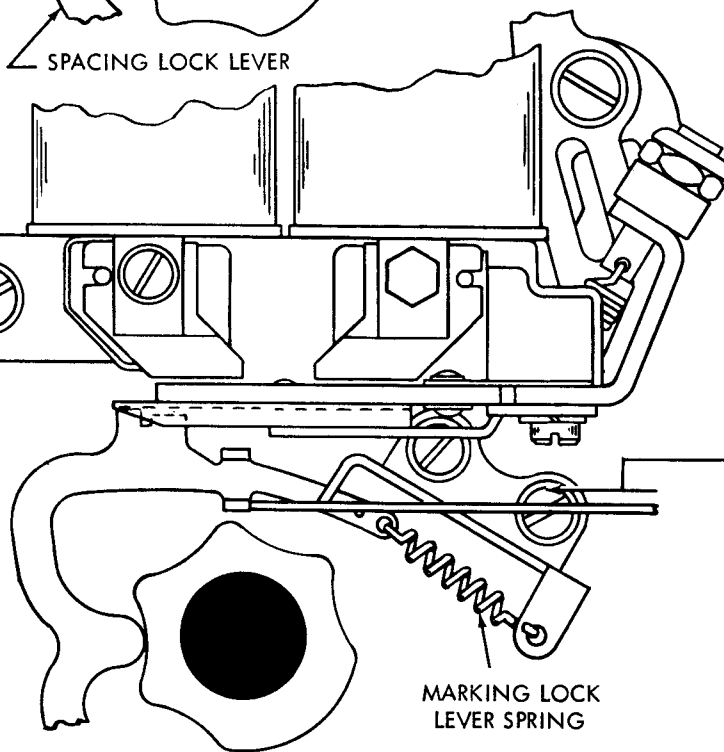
Automatic Typewriter, Selector Mechanism, Right Side View
